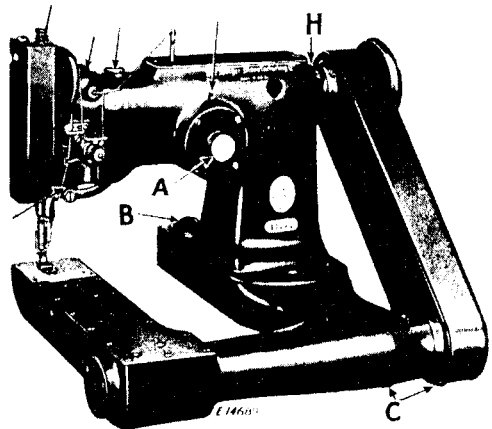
Front View of Machine, Showing Oiling Points Also Adjustments on the Machine
